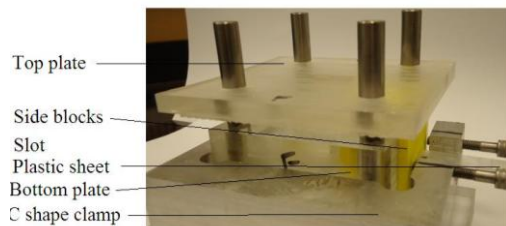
Fabricated mold used for the preparation of bone cement specimens.
